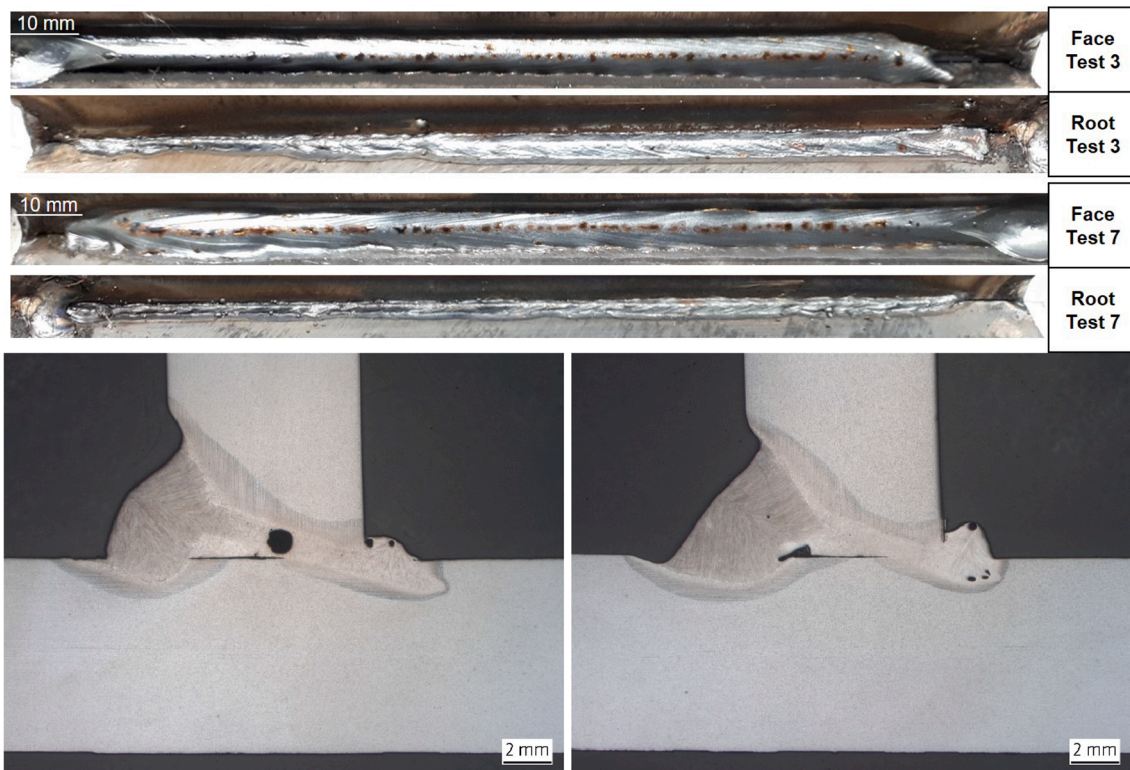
Macrographic images of face and root sides of T welds obtained in Tests 3 and 7.
